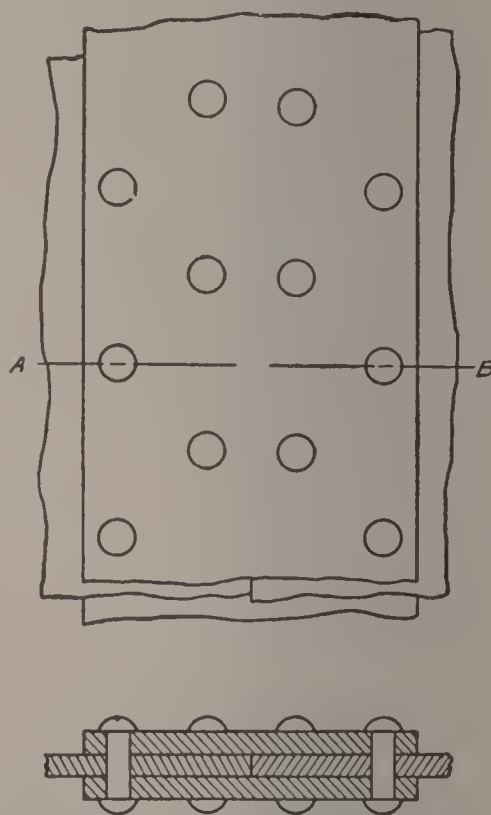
Butt Joint Showing Use of Cross-hatching When Section Is Through Different Pieces of One Material
